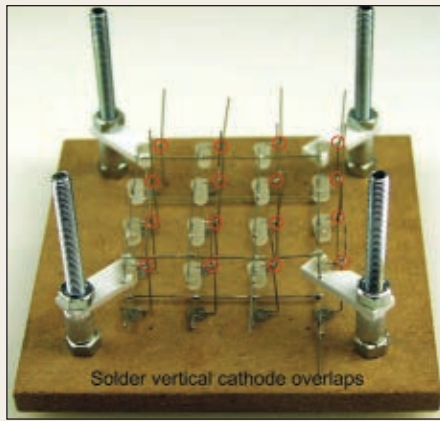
Layer 0 and Layer 1 in the jig; the red circles show the common cathode solder joints.
